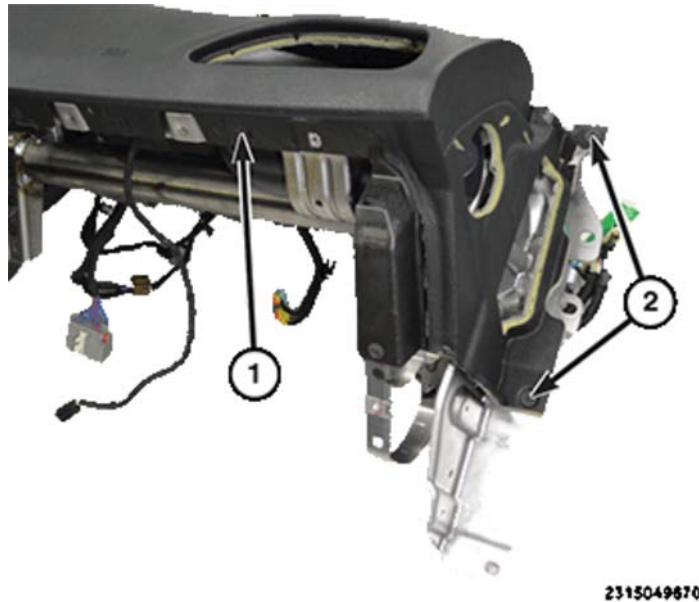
Right Side Of The Instrument Panel Screws & Glove Box Opening Screws
